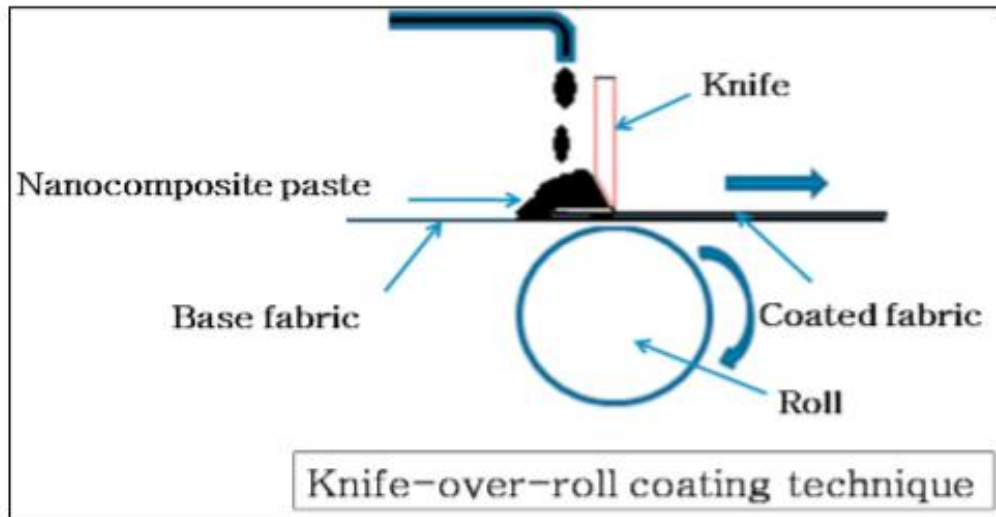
Illustration of Knife-over-roll Coating Technique[37]
